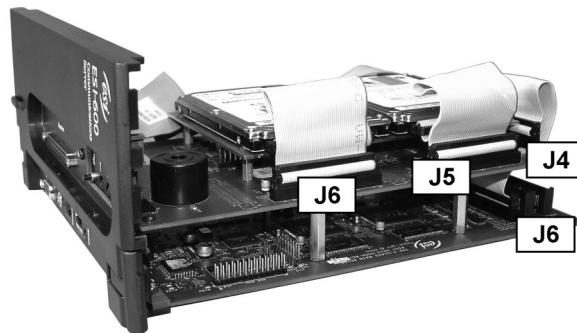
Completed M3 installation (ESI-600 main board and faceplate shown)
